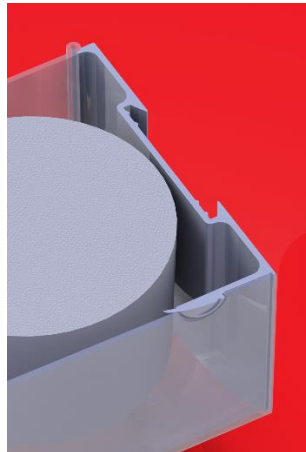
Cross section of the dispenser; top left the hinge can be seen, in the middle the mounting system, bottom left the small locating step and the latch
